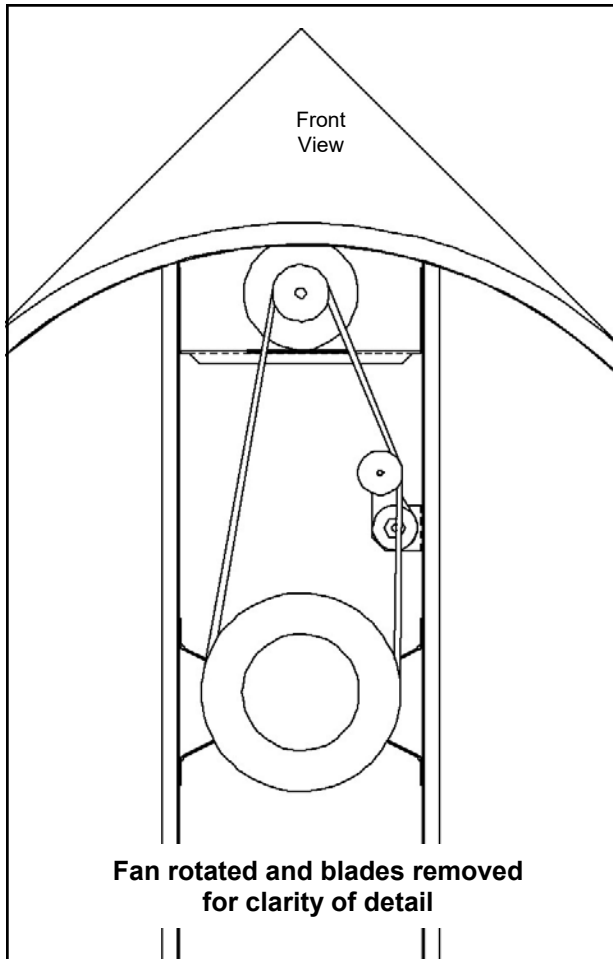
Motor/Pulley, Tensioner, Disc and Belt
